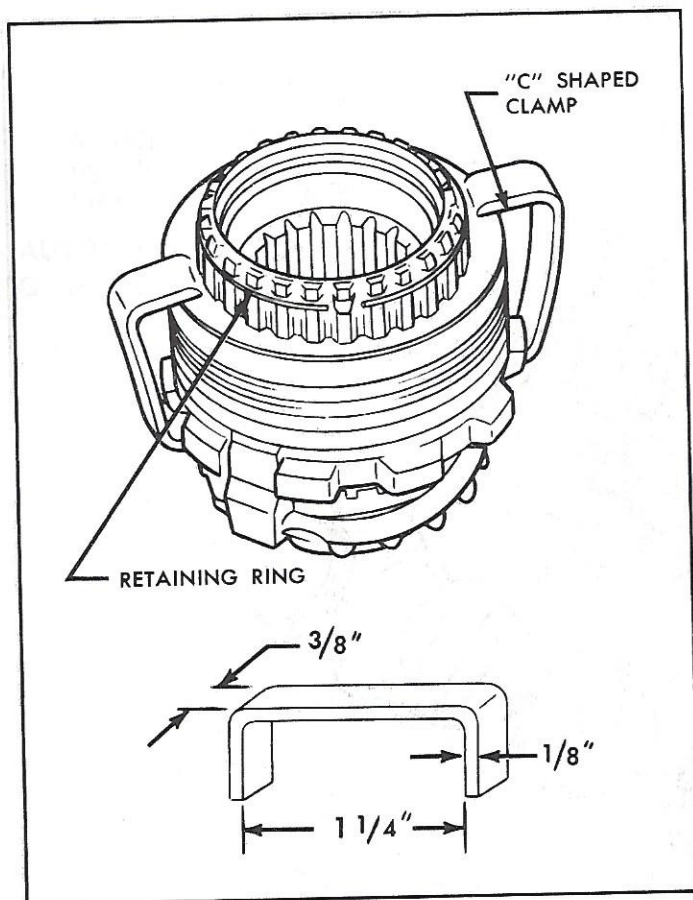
C-5K--Using Clamp and Vise to Compress Return Spring
